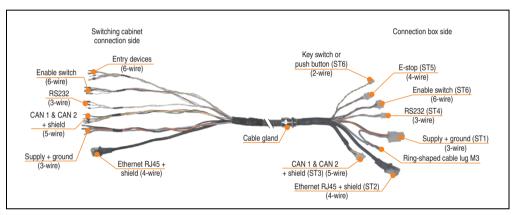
Mobile Panel box cable 5CAMPB.0100-10
